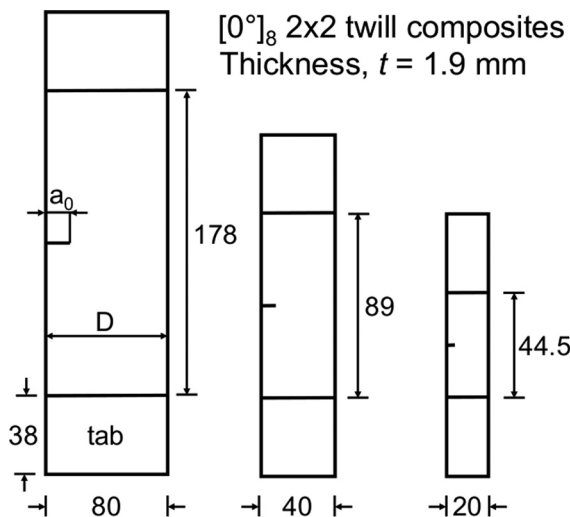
Geometry of single edge notched tension (SENT) specimens used (units: mm)
